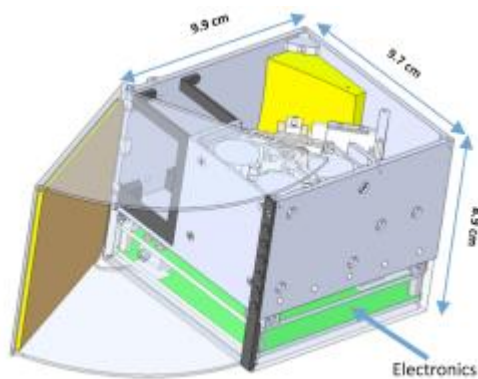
Isometric view of the Tri-TIP instrument, with the hinged mirror assembly deployed. (From Nicholas et al., 2019).
